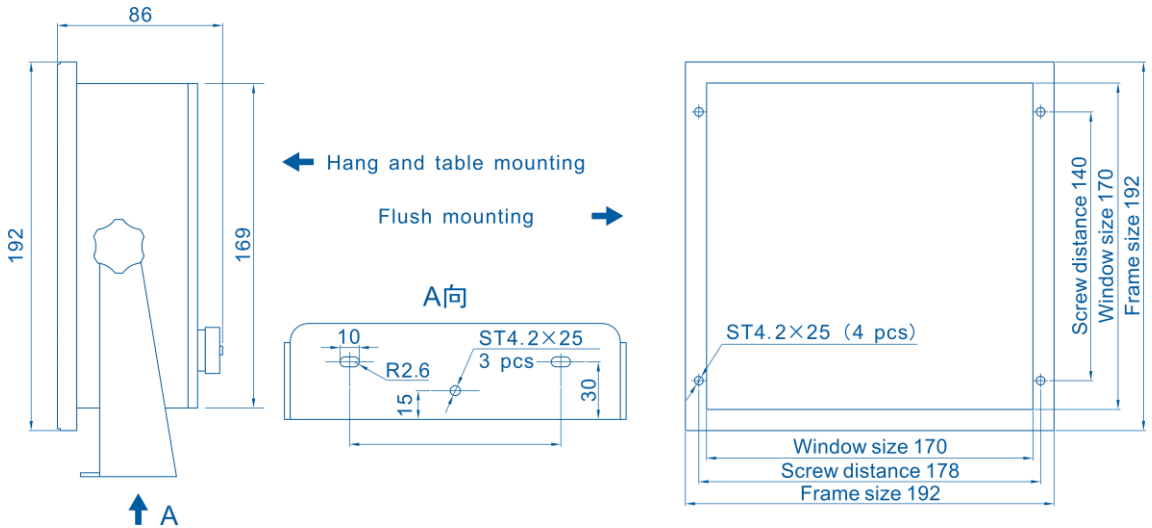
Dimension of Rudder Angle Indication Unit AD804
